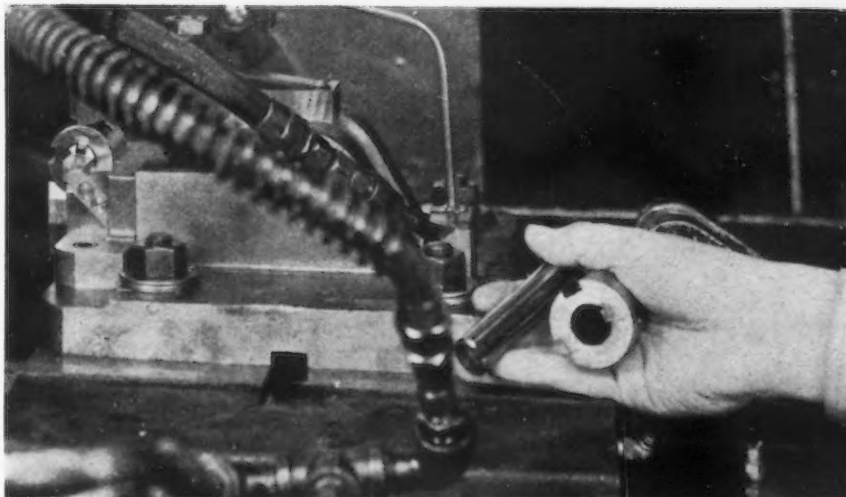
Broaching a knife edge on pivots has been developed to a very accurate stage. Pivot is shown in fixture at left. The hand is holding a pivot blank and the spool which holds, clamps, and supports the part against the thrust exerted by the broaches.
